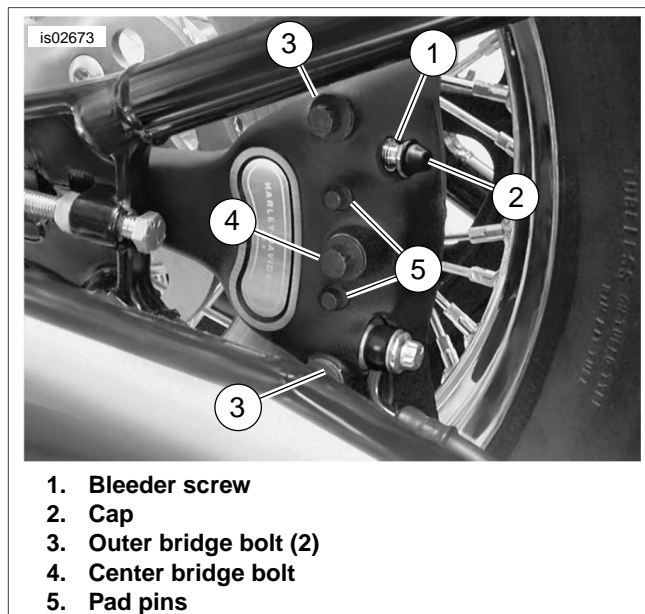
Original Pad Pins and Bleeder Screw on Rear Caliper Brake (Softail Shown)
